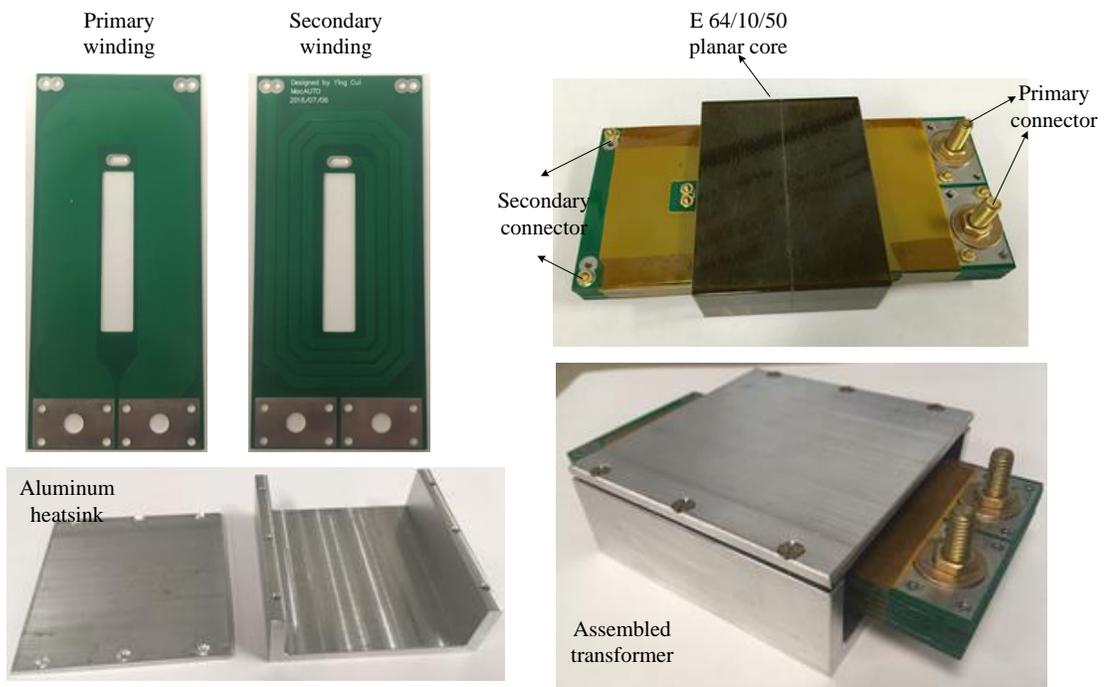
PCB winding and assembled planar transformer in (Cui Ying, 2017).
